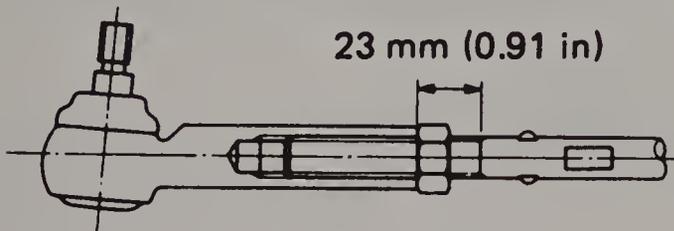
Correct rod end-to-tie-rod position (Sec 21)
